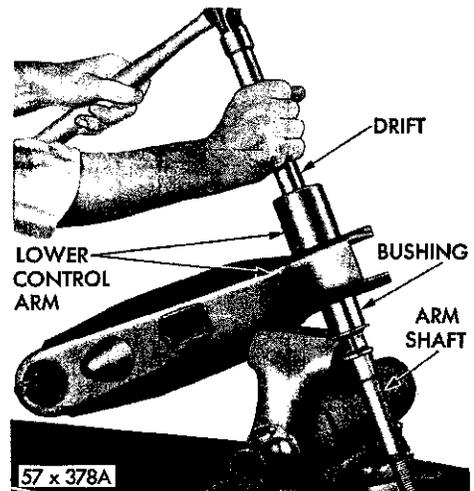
Removing the Lower Control Arm Shaft and Bushing
